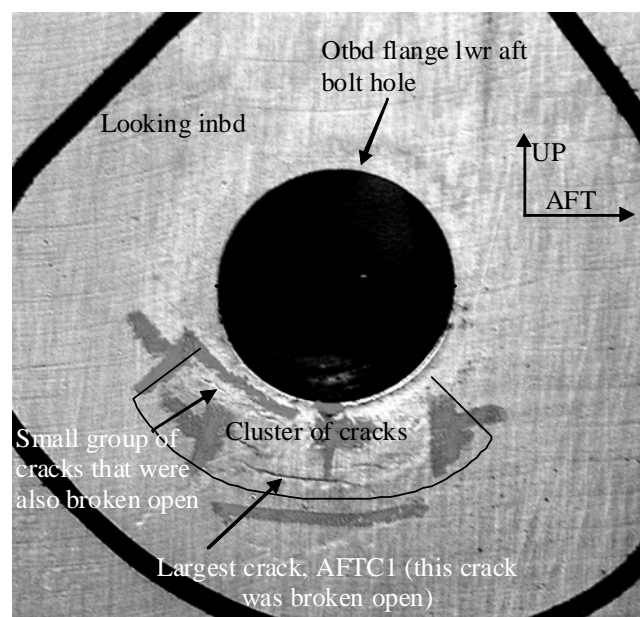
The outboard surface of the stub outboard flange showing the aft lower fastener hole and the cracking about the lower side of this hole. The two sections of cracking that were broken open are marked.
